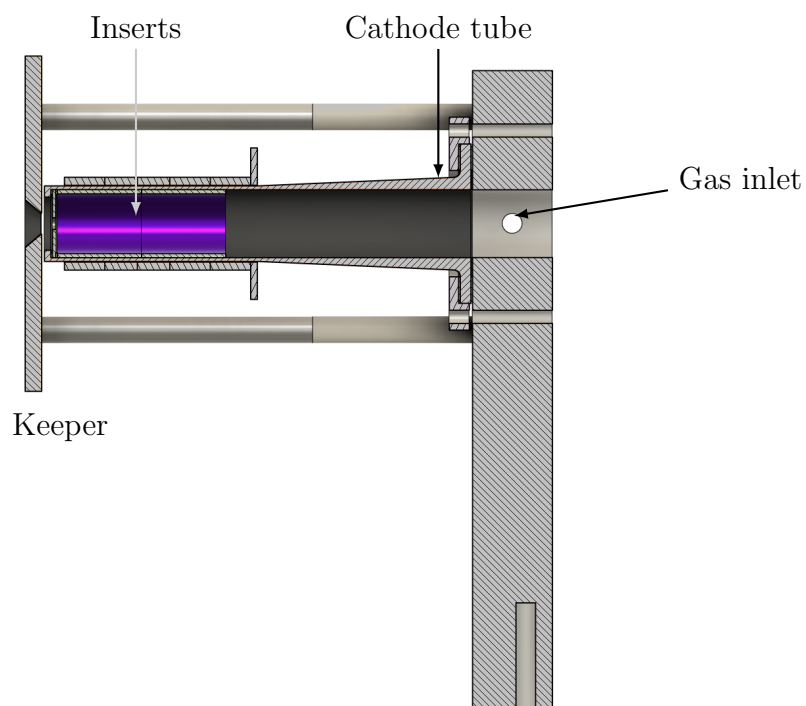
Cutaway view of the cathode assembly showing the location of the installed inserts and gas inlet.
